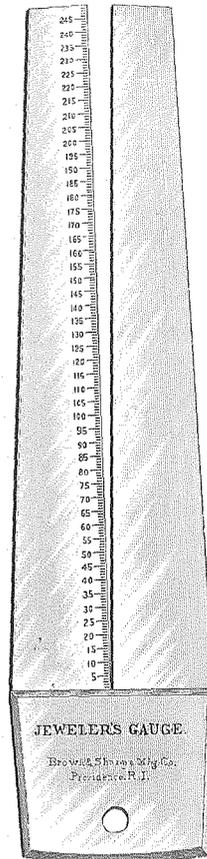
A Jeweler's Gauge Reading to the 1-1000 of an Inch
